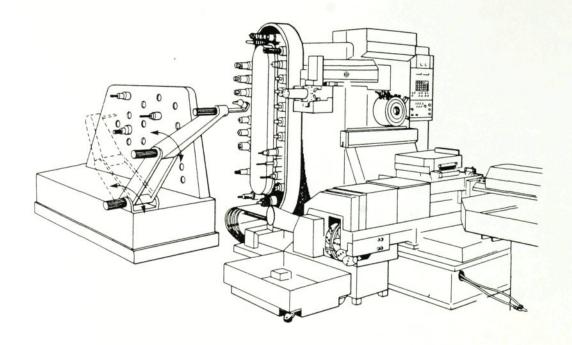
Concept of simple AGV/robot for tool changing the first MFS, two tool drums are mounted back-to-back on columns behind the machines.
